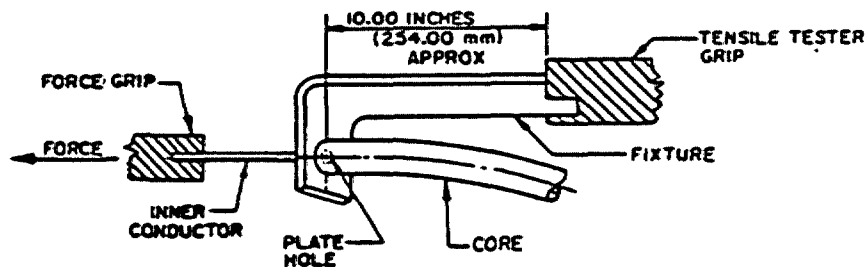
A: Typical Test Fixture for Use with Flexible Cables.
